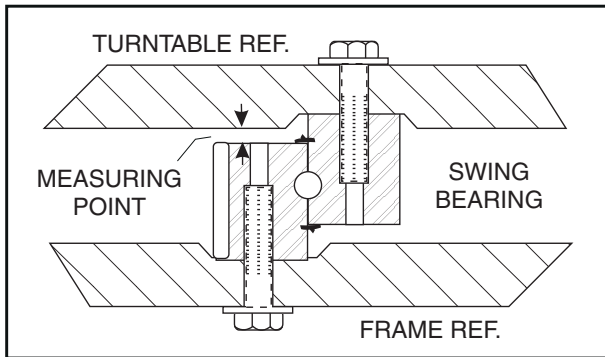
Swing Bearing Tolerance Measuring Point
